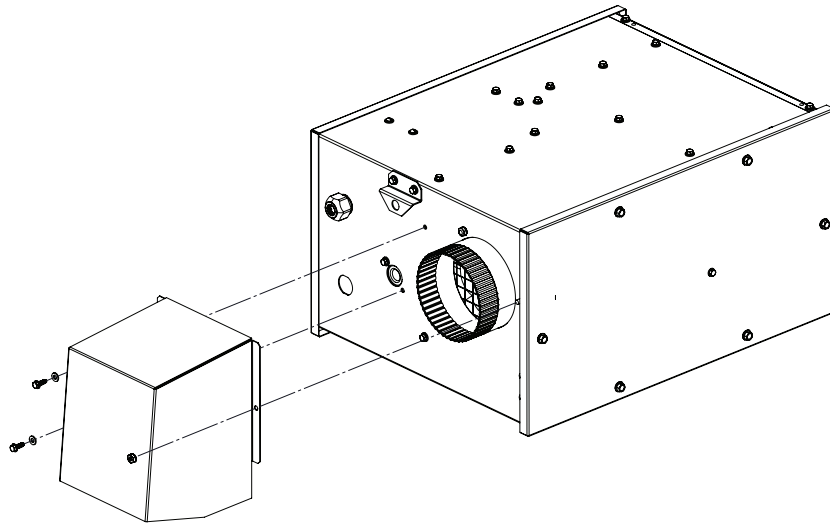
Combustion Air Inlet Hood Installation (Model VZH)
